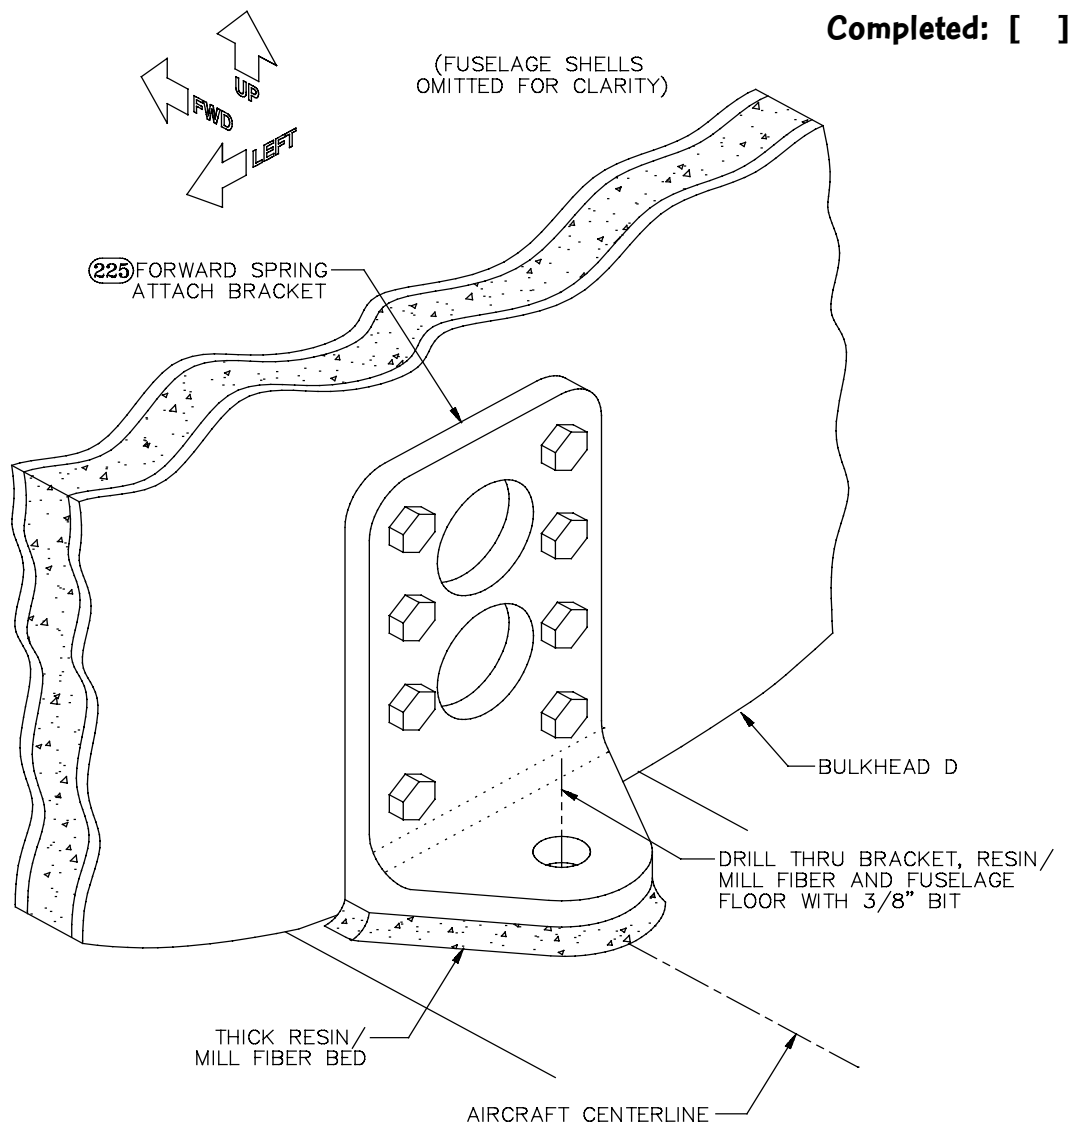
Drilling the Forward Spring Attach Bolt Hole
